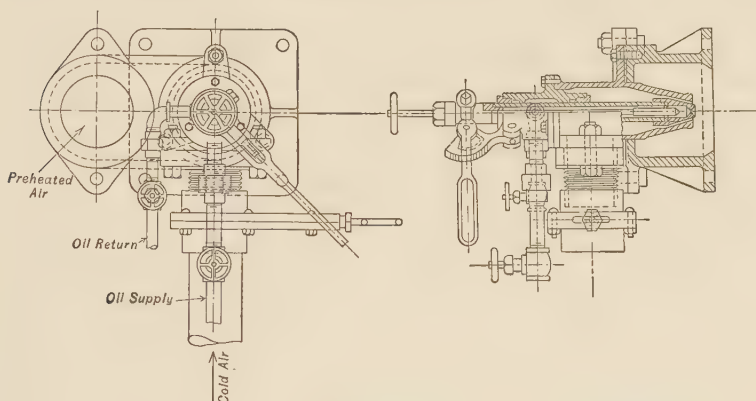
Oil burner for preheated air. Oil tube is surrounded by cold air. Recirculating system forces oil to flow through burner continually.
